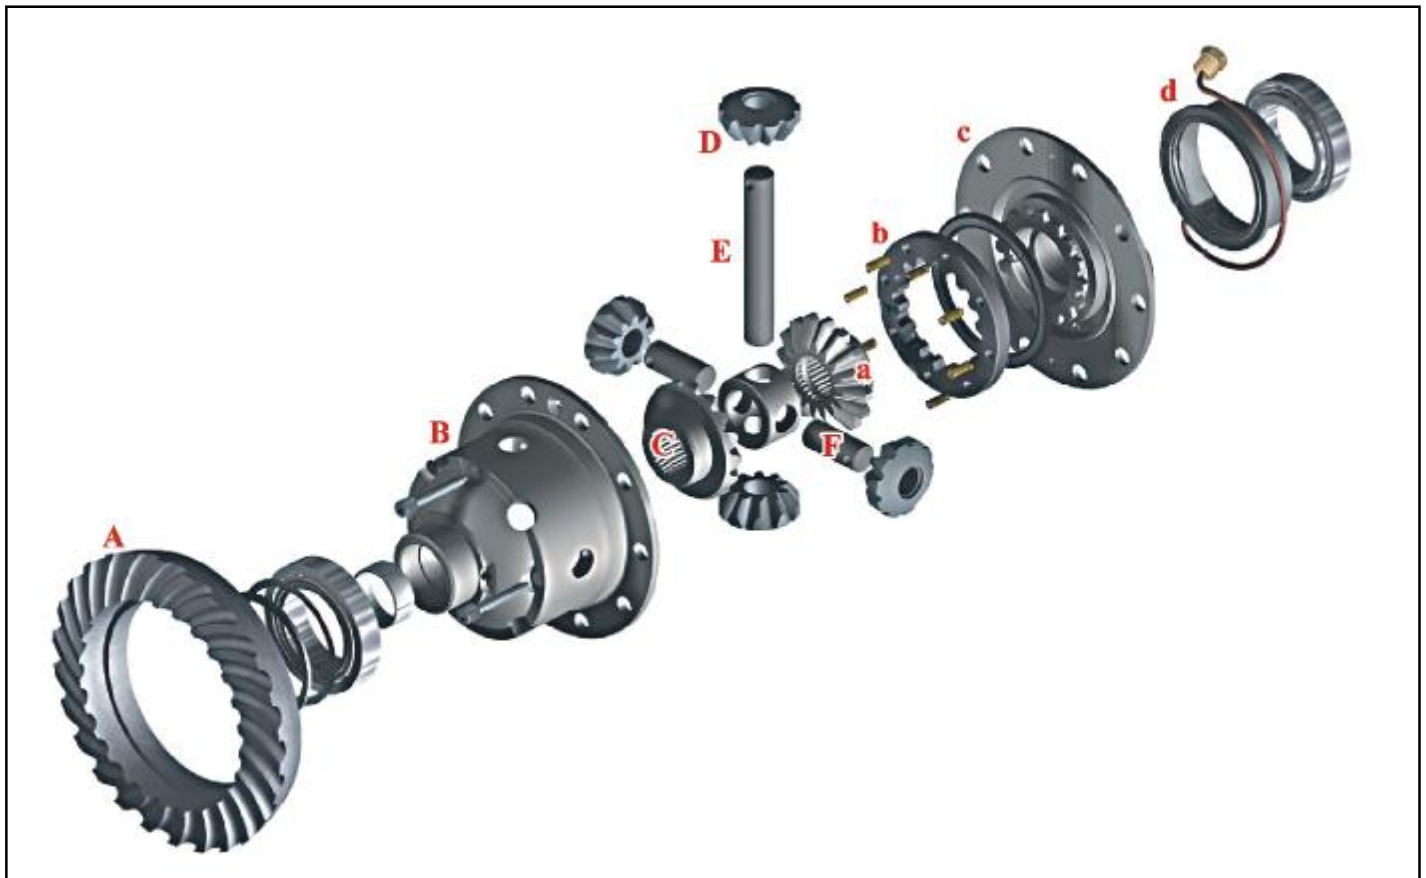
This ARB blow-up is very similar to an open diff. Capital letters designate common parts and lower case letters are unique ARB parts. A is the ring or crown gear (wheel); B, the carrier or diff housing/case; C, the axle or end gear; D, the spider gears (4), or as they are called on the ARB Web site, pinyon gears, and E and F are spider gear shafts. a is the special ARB axle gear; b, the clutch gear; c, the flange cap assembly, and d, the compressed air entry collar.
